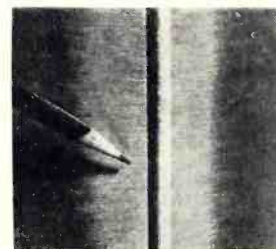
Butt-joint 1/8-inch Magnesium plate automatically welded at rate of 24 inches per minute.
